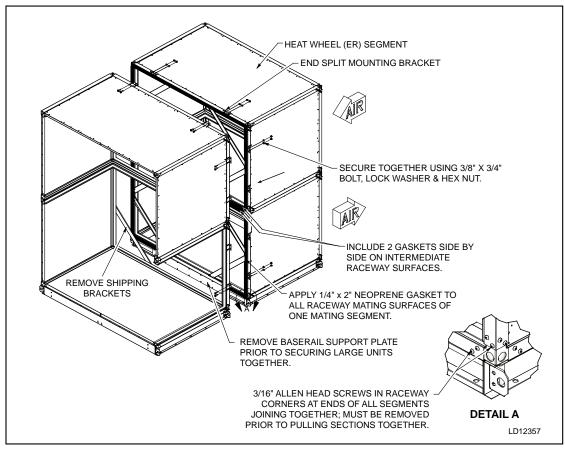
ASSEMBLY OF END CHANNEL SHIPPING SPLIT (ENERGY RECOVERY WHEEL SHOWN)
